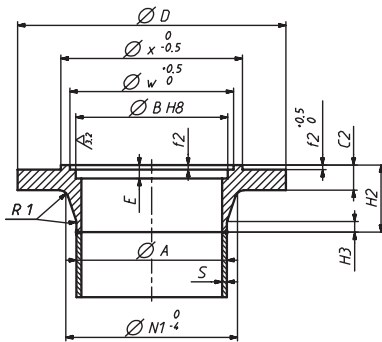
Dimensional drawing of the desuperheater connection (other dimensions upon request)
